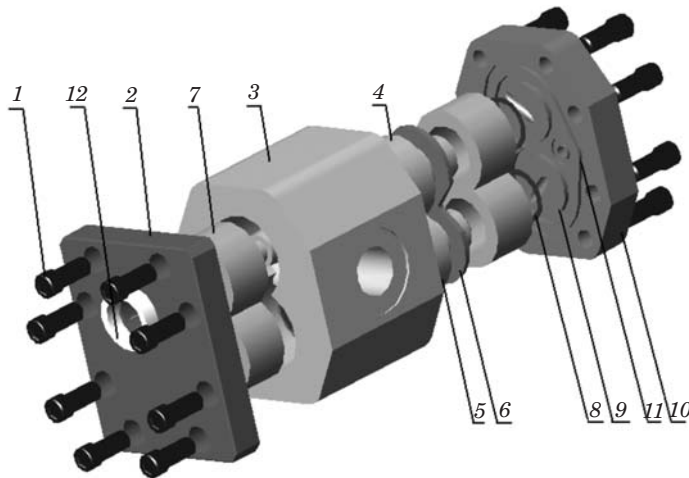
Demonstrative drawing of the PZ2 type gear pump structure: 1 – bolts, 2 – front end plate, 3 – casing, 4 – driving wheel (drive gear), 5 – driven wheel (idler gear), 6 – resistance filler (compensation), 7 – bearing sleeve, 8 – thrust ring, 9 – seal under the driven wheel, 10 – rear end plate, 11 – large seal (stadium), 12 – Shaft end seal
